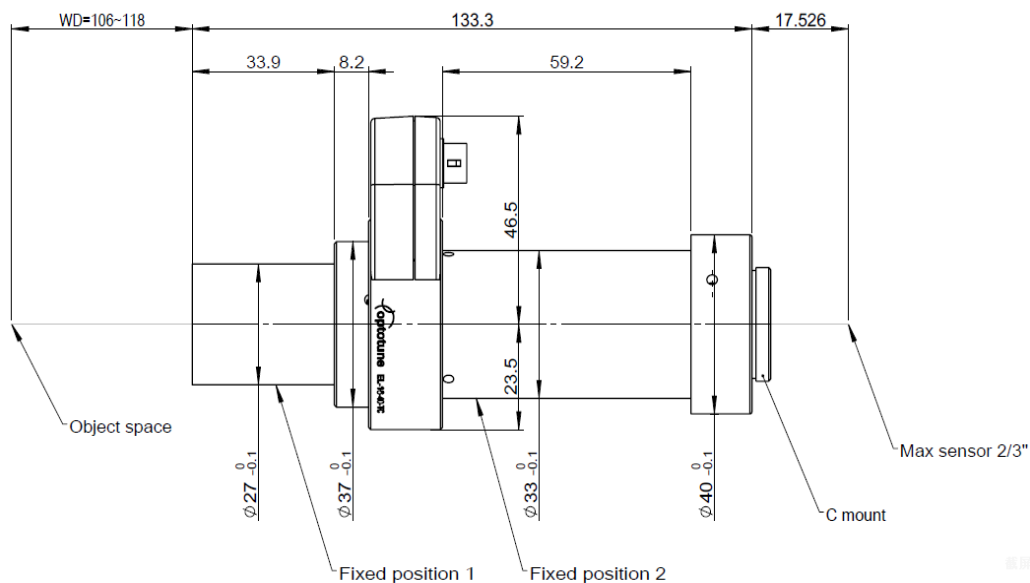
Mechanical drawing of the TS23-2.0-110-EL
